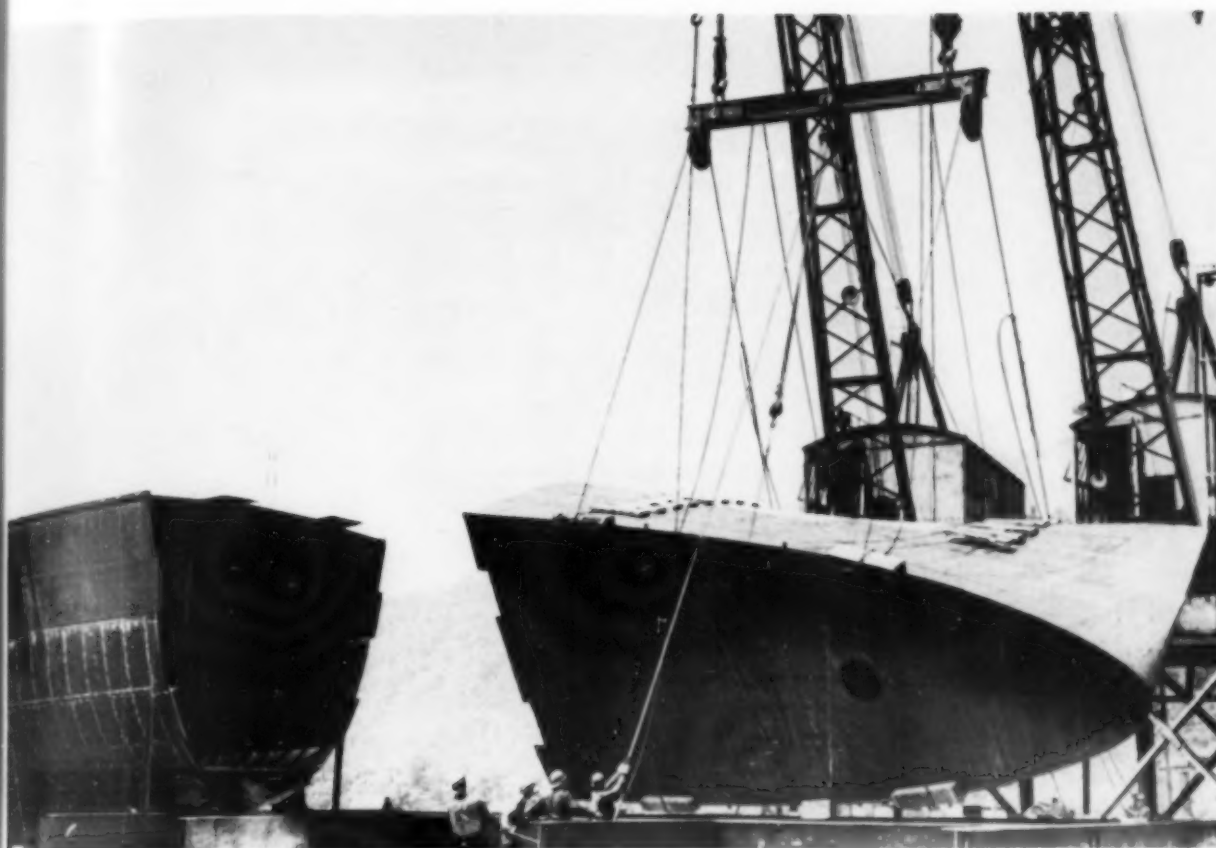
Bow and Stern Sections Were Completely Erected Upside Down, Moved Over to the Main Assembly on Transfer Cars, and Each Turned Over and Moved Up to the Engine Midbody Section by Two Whirler Cranes Acting in Unison
